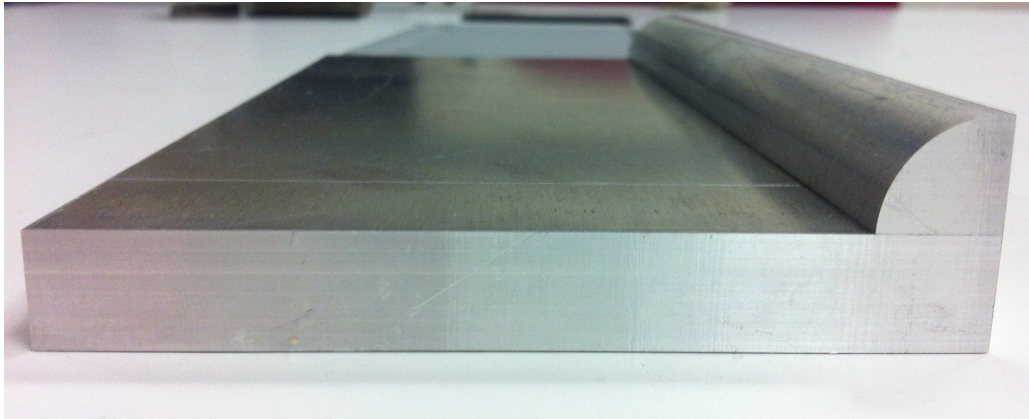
Ad-Hoc Aluminum Mold to Aid Specimen Slicing
